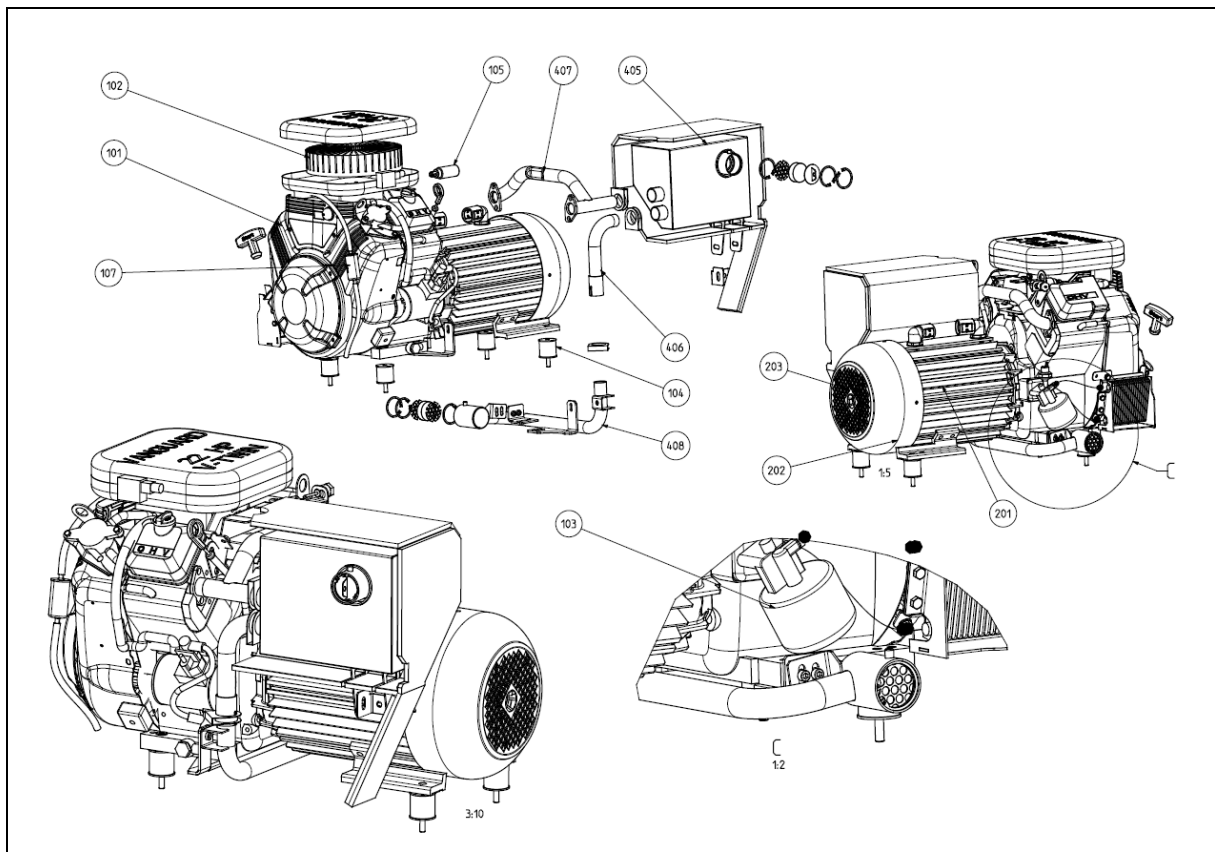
Replacement parts for engine, alternator and exhaust
